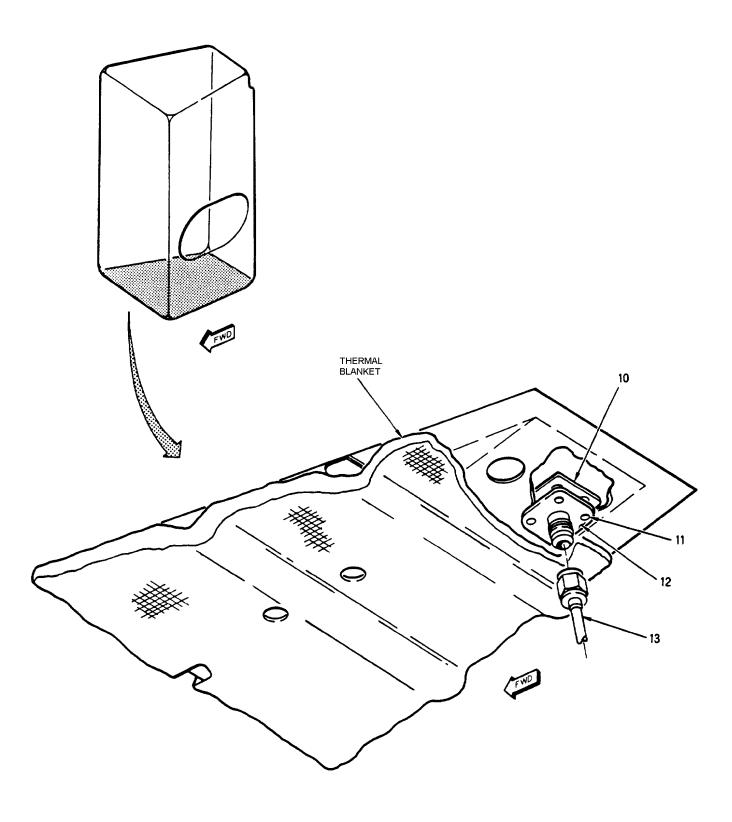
Vent Tank Cavity Bulkhead Fittings and Supports (Sheet 4)
